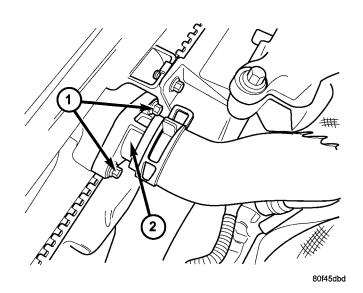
Radiator Inlet Neck - 2.4L Turbo
